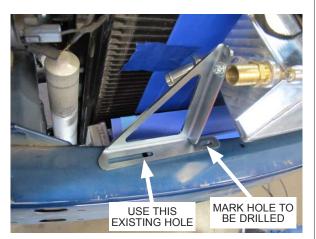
s: Mark the holes to be drilled on the passenger side of the front bumper support
